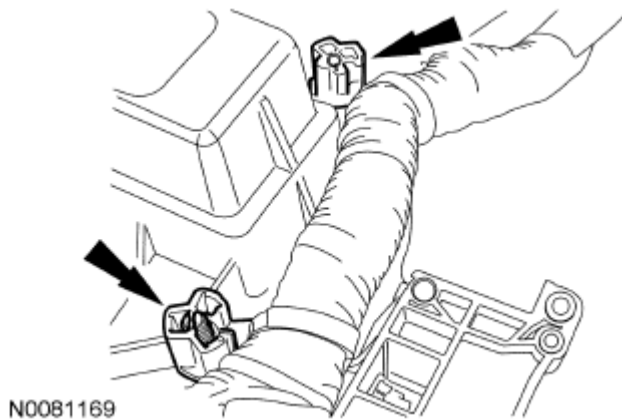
Locating Wiring Harness Retainers And LH Side Valve Cover Stud Bolts
